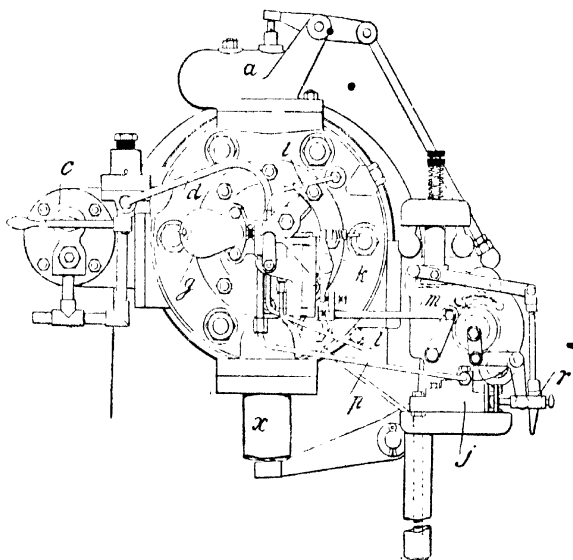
End view of Blackstone air-injection engine for residual oils, showing details of governor-controlled fuel pump and injection-valve operating gear.
